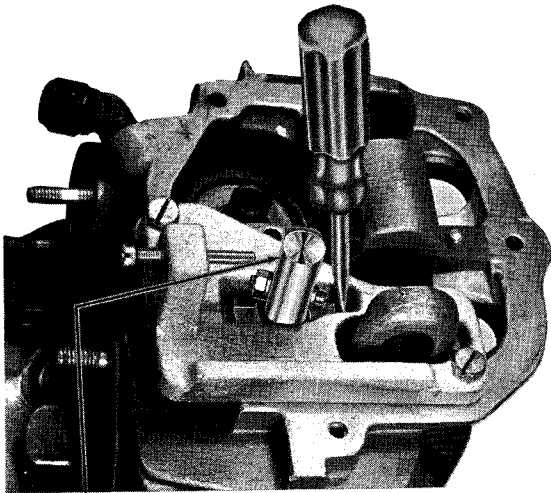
View Showing Screwdriver in Position for Moving Exhaust Valve Assembly
